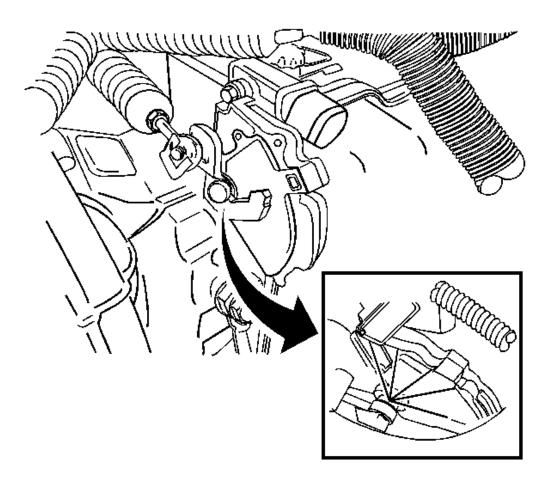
View Of Range Selector Cable & Cable Bracket Retainer Courtesy of GENERAL MOTORS CORP.
